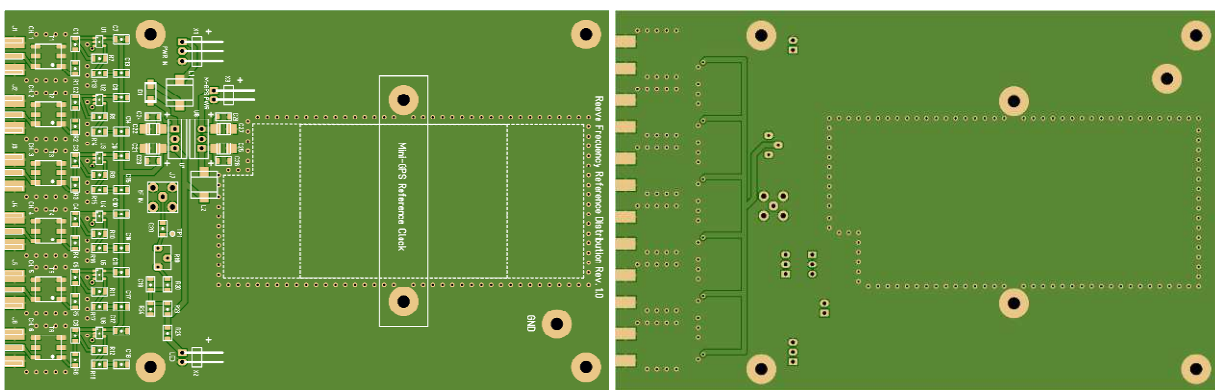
~ Prototype printed circuit board top and bottom images produced from the PCB Gerber files and shown at 50% scale. The PCB is 100 x 160 mm and will fit many extruded aluminum enclosures, such as the Box Enclosures model B3-160. I equipped the PCB with four 3.2 mm diameter holes for mounting in an enclosure that does not have built-in PCB rails. The space dedicated to the Mini-GPS Reference Clock is seen in the silkscreened open area. In the prototype this unit was mounted with a brass strap fastened with screw fasteners. However, for production, I changed the PCB to use oblong holes
